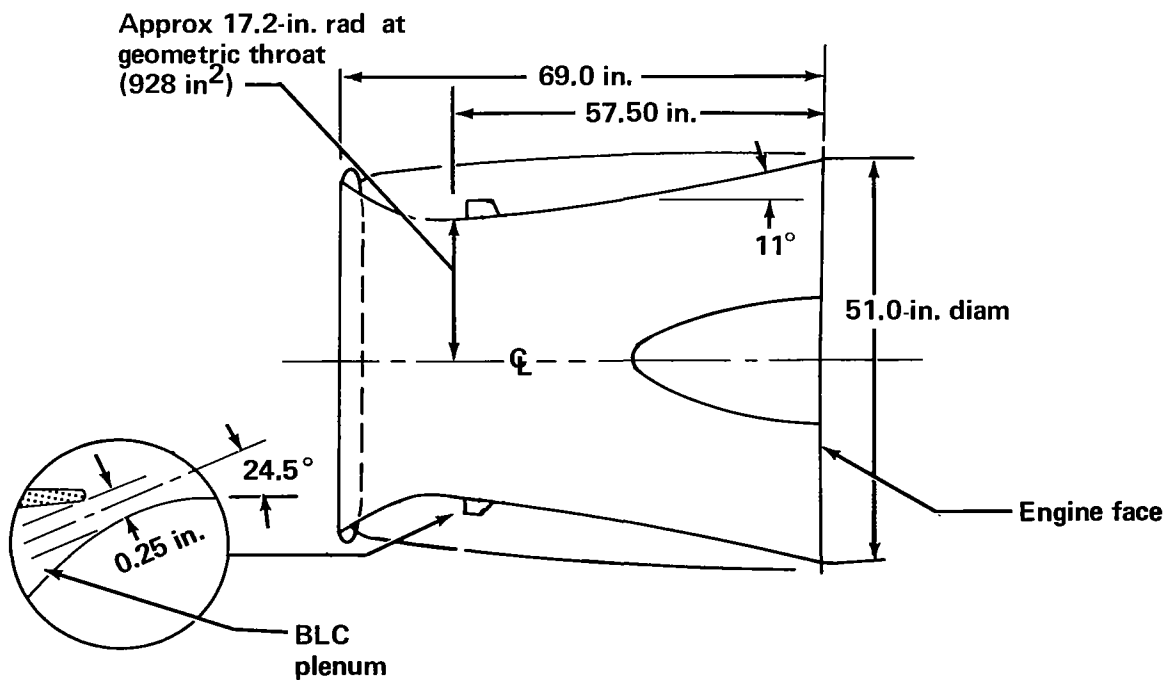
CROSS-SECTION SKETCHES OF FULL-SCALE INLETS
